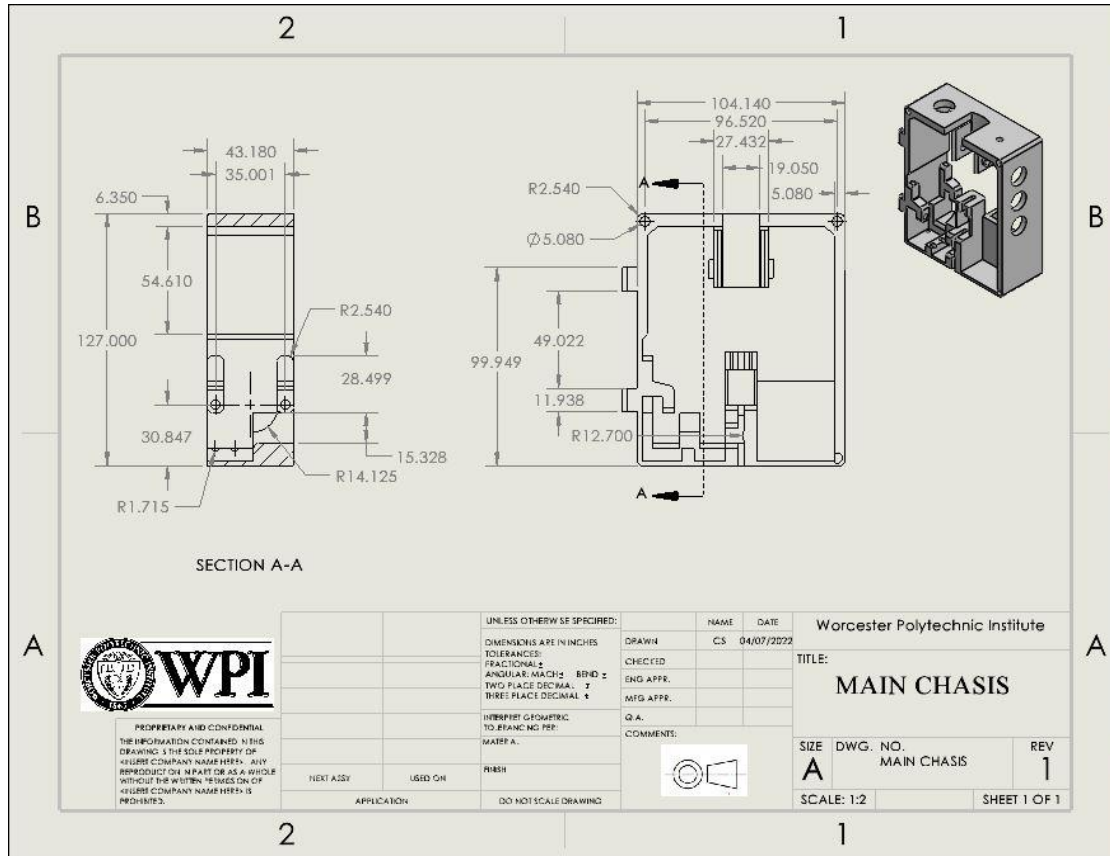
eDrawing (Using SolidWorks) of the Main Chassis that host the drip sensor and the pinching mechanism
